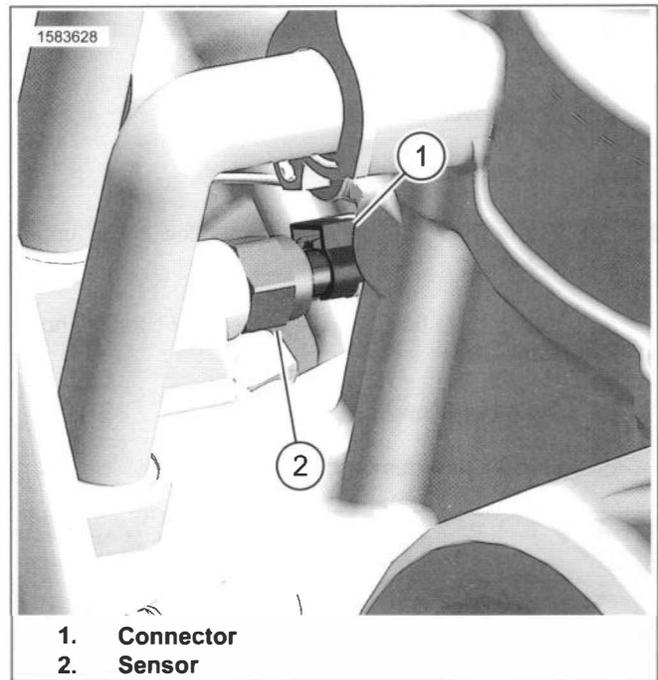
Engine Coolant Temperature (ECT) Sensor
